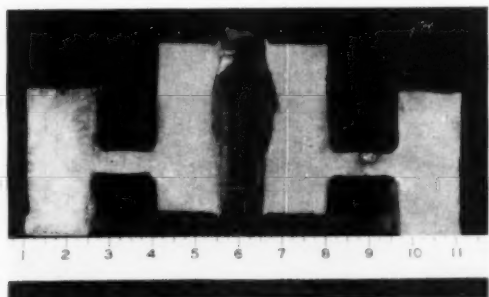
Remake of sample casting, sectioned and etched, gating same as Fig. 10. Pouring temperature, 2500F. Casting had hot tears in flange fillets, surface shrinkage in the web, and excessive sink at the base.
